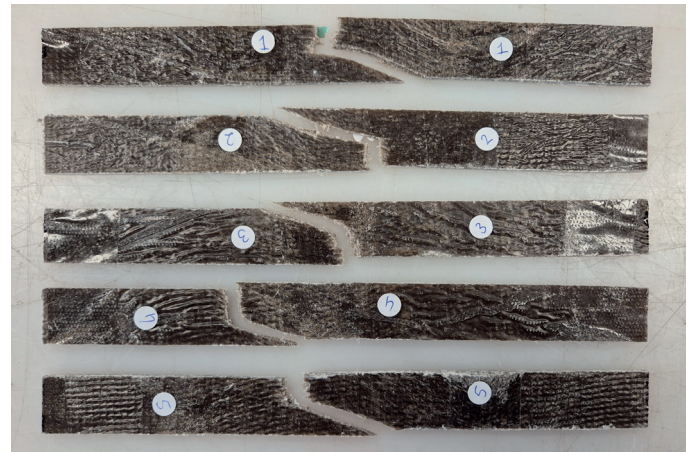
Fracture specimen 1-5 after tensile test (own image)
